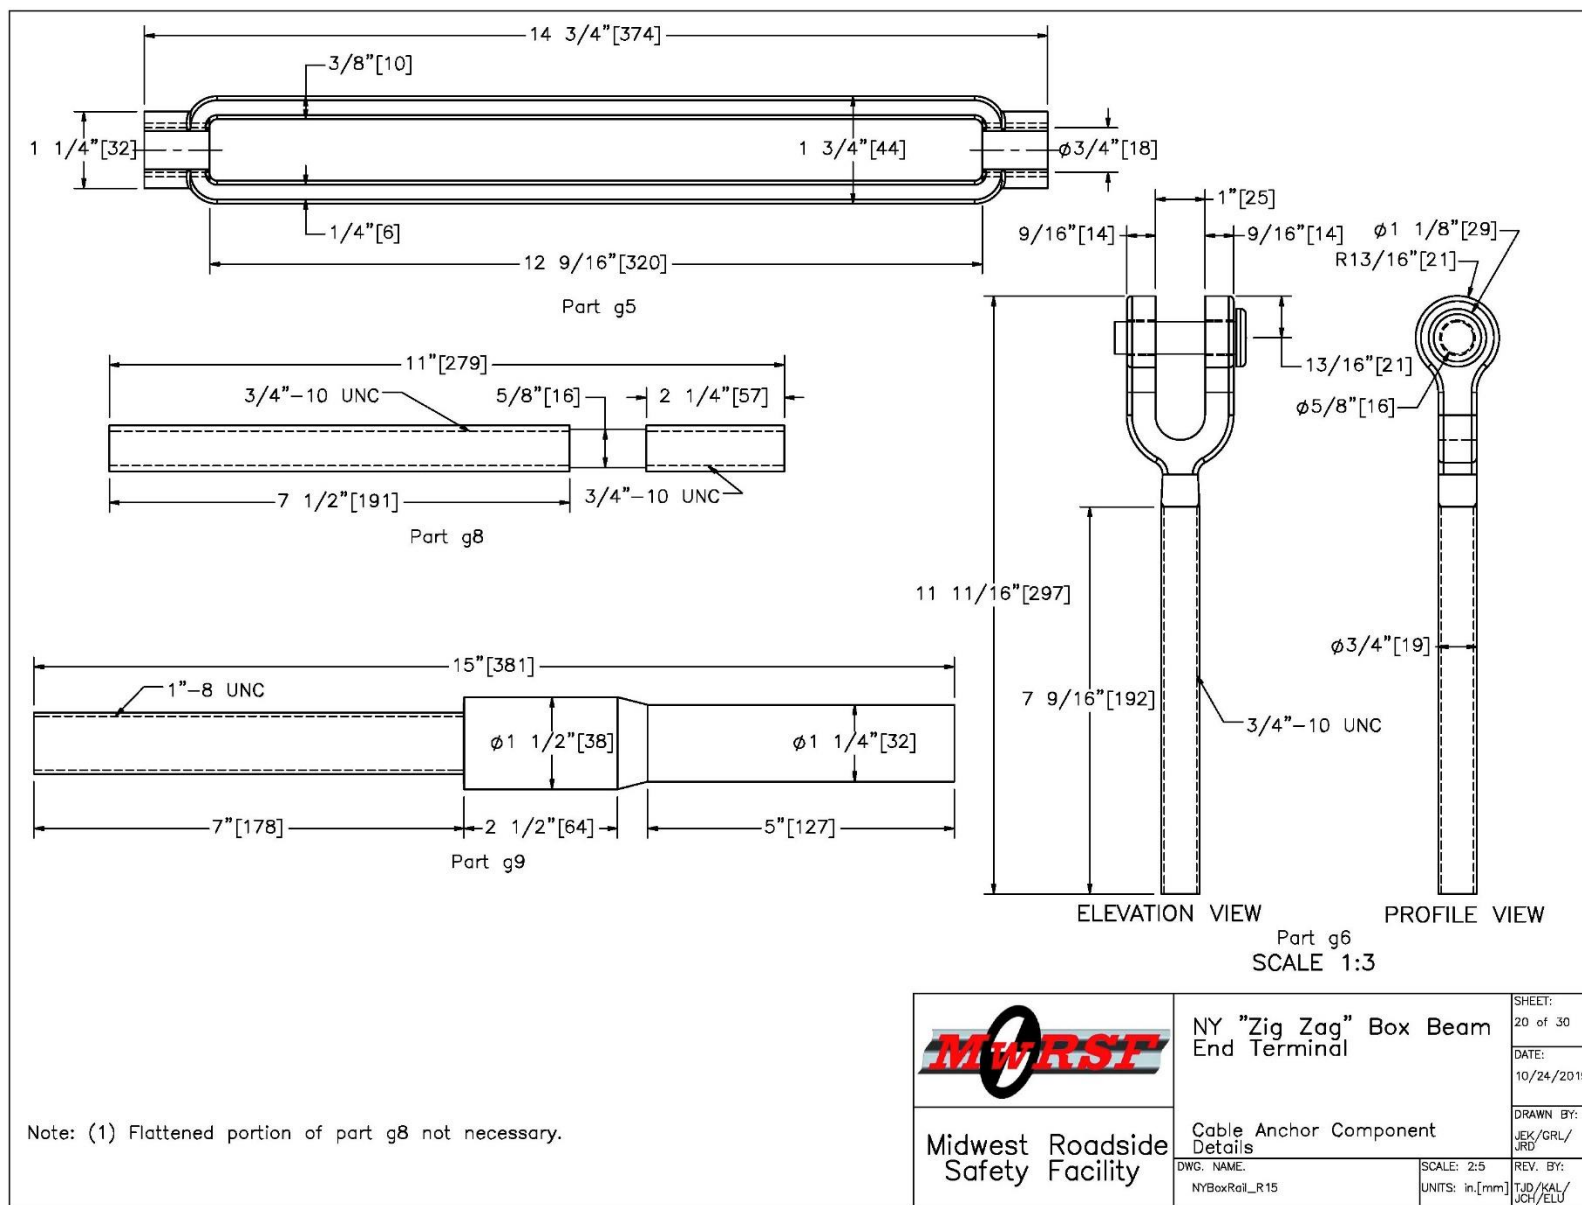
Cable Anchor Component Details, Test No. NYT-1
